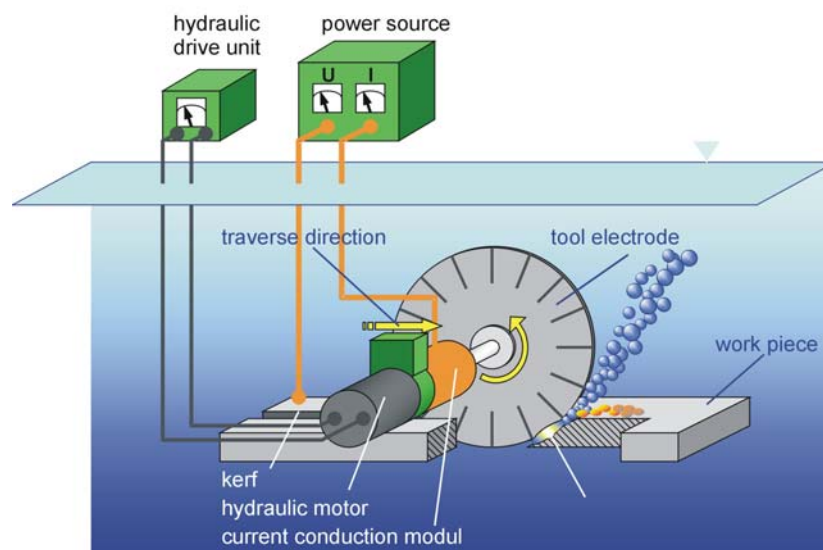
Principle of Contact-Arc-Metal-Grinding (CAMG)
